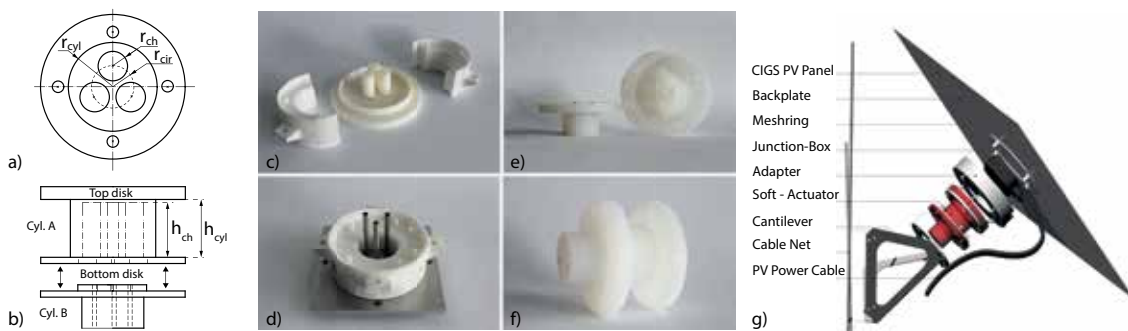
Design, fabrication, and final assembly of SoRo-Track as part of a photovoltaic façade module. a) Horizontal cross-section of SoRo-Track; b) Vertical cross-section of SoRo-Track; c), d) Parts of 3D-printed mold; e) Fabricated parts of SoRo-Track; f) Final SoRo-Track after gluing; g) SoRo-Track with thin-film PV module mounted on a cantilever. Measurements: $r_{cyl} = 25\text{mm}$, $r_{cir} = 11.5\text{mm}$, $r_{ch} = 8.5\text{mm}$, $h_{cyl} = 35\text{mm}$, $h_{ch} = 33\text{mm}$
